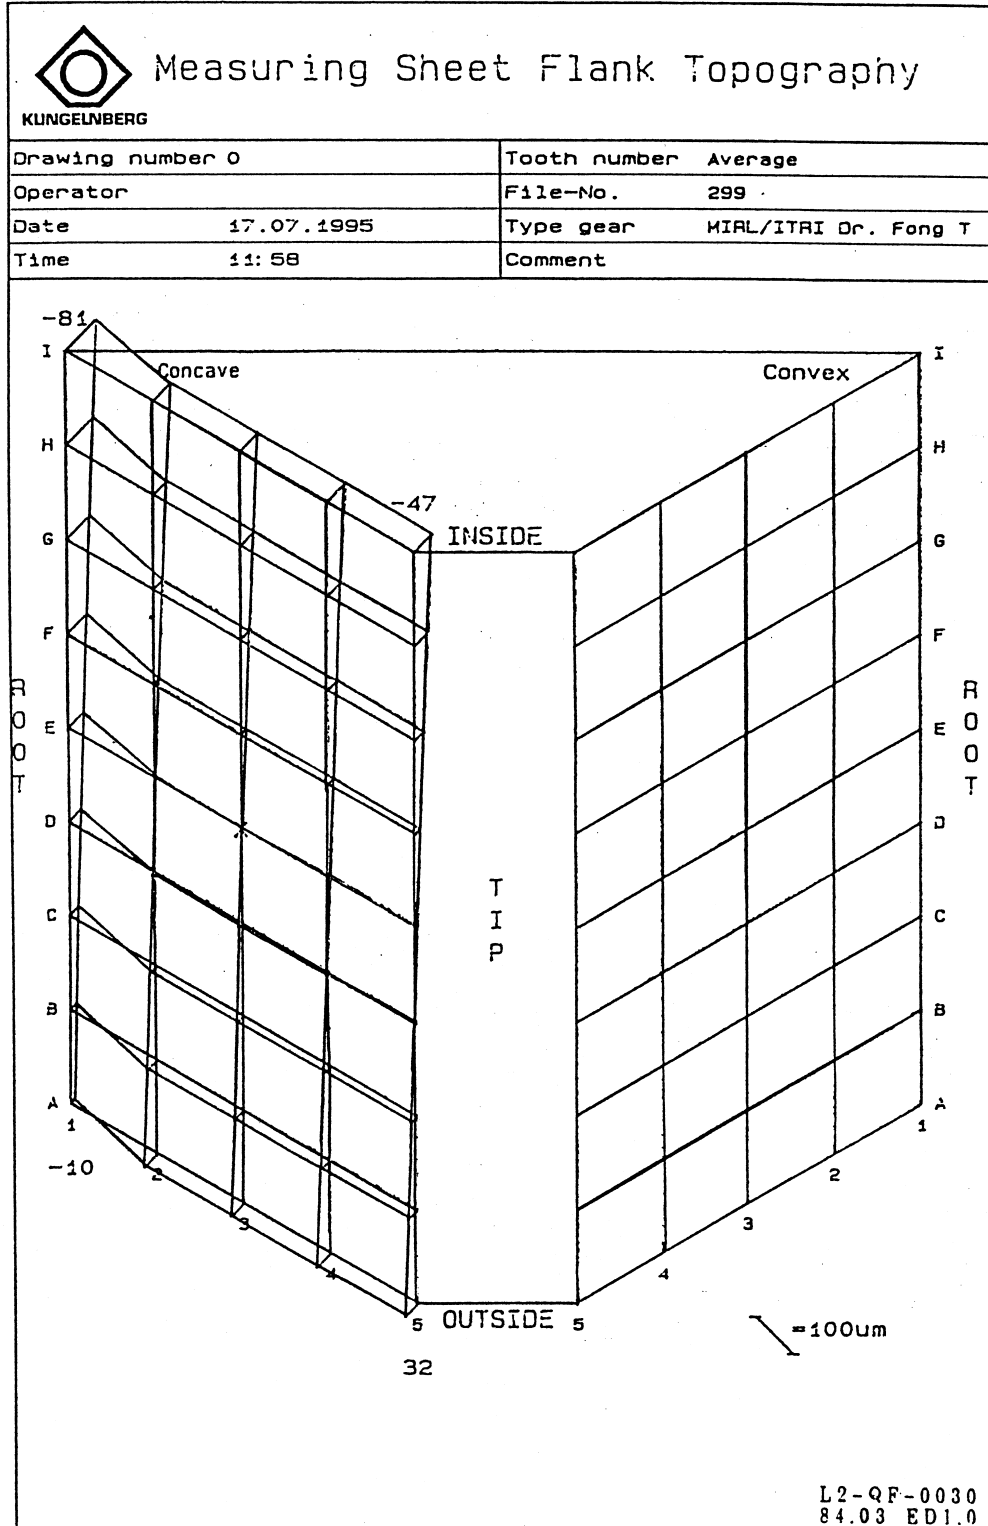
Pinion surface deviations on concave side cut by using primary machine-tool settings.
